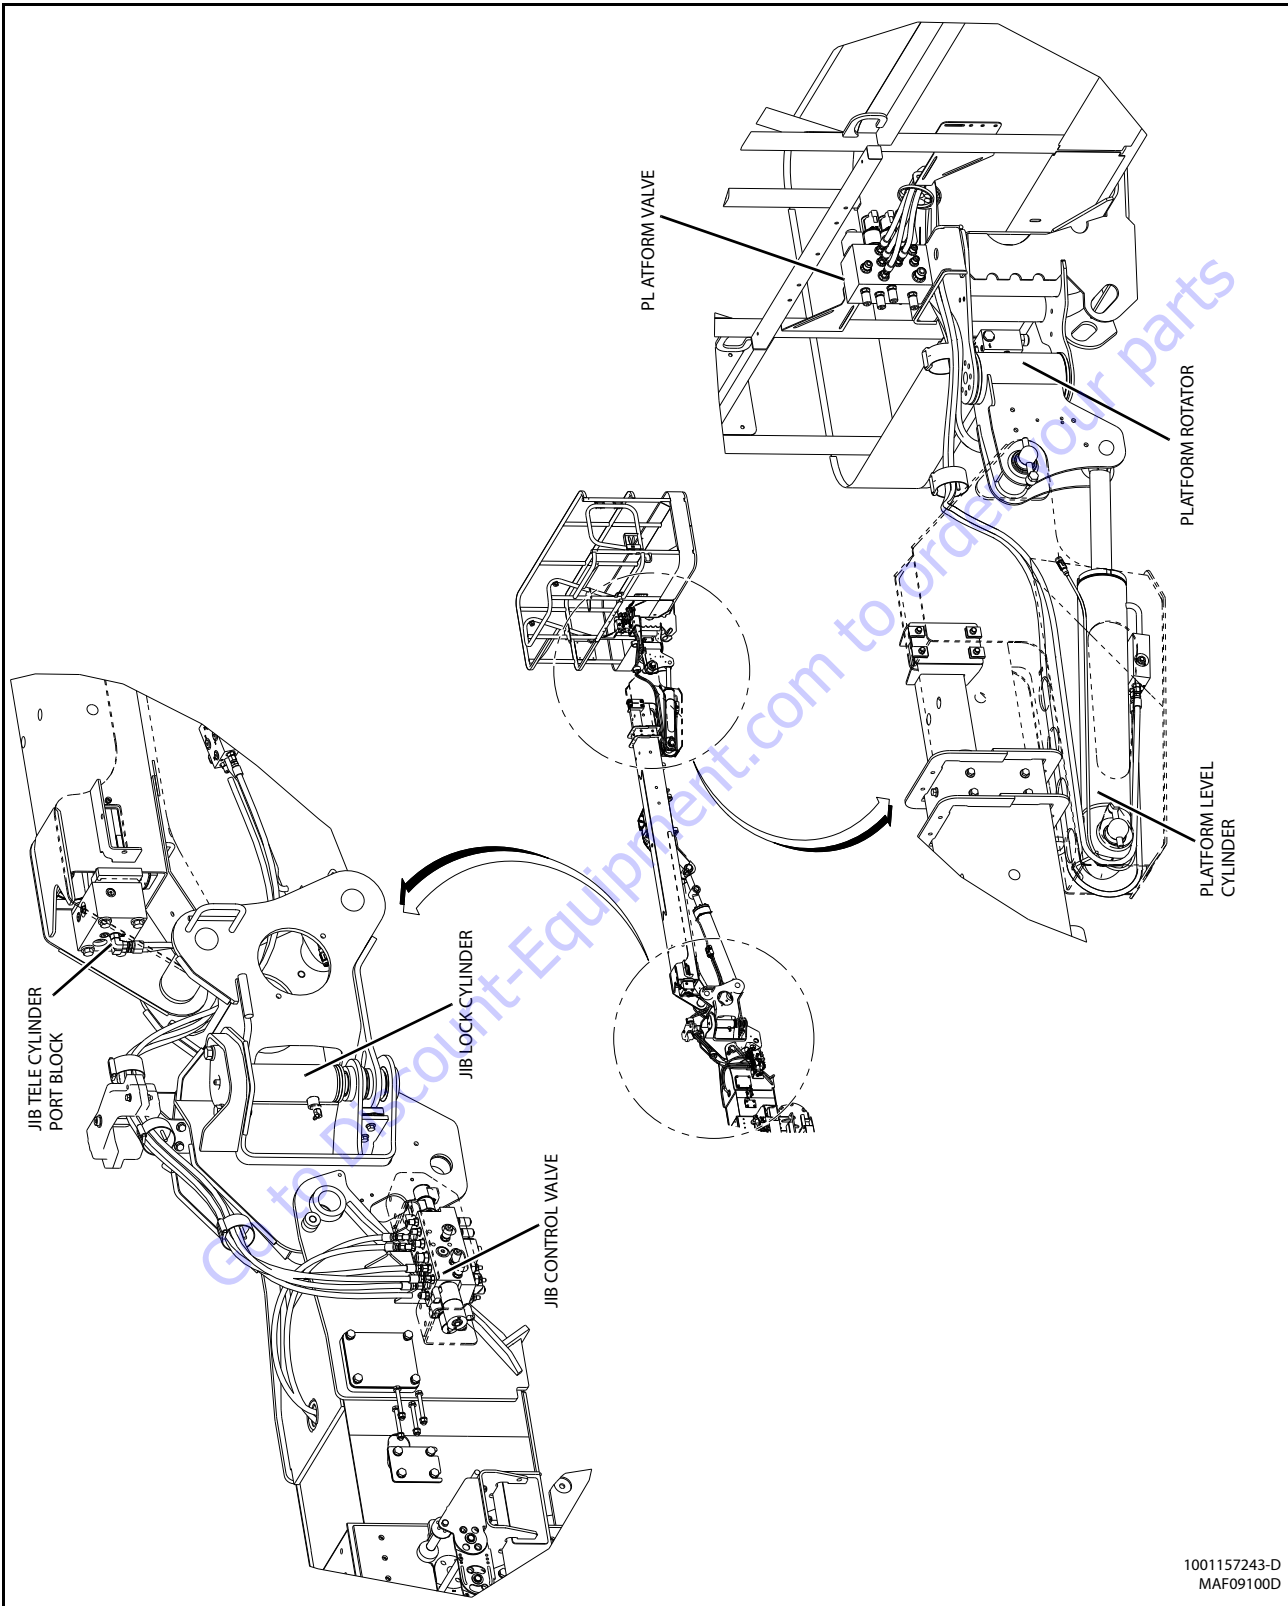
Jib Hydraulics - Sheet 3 of 7
